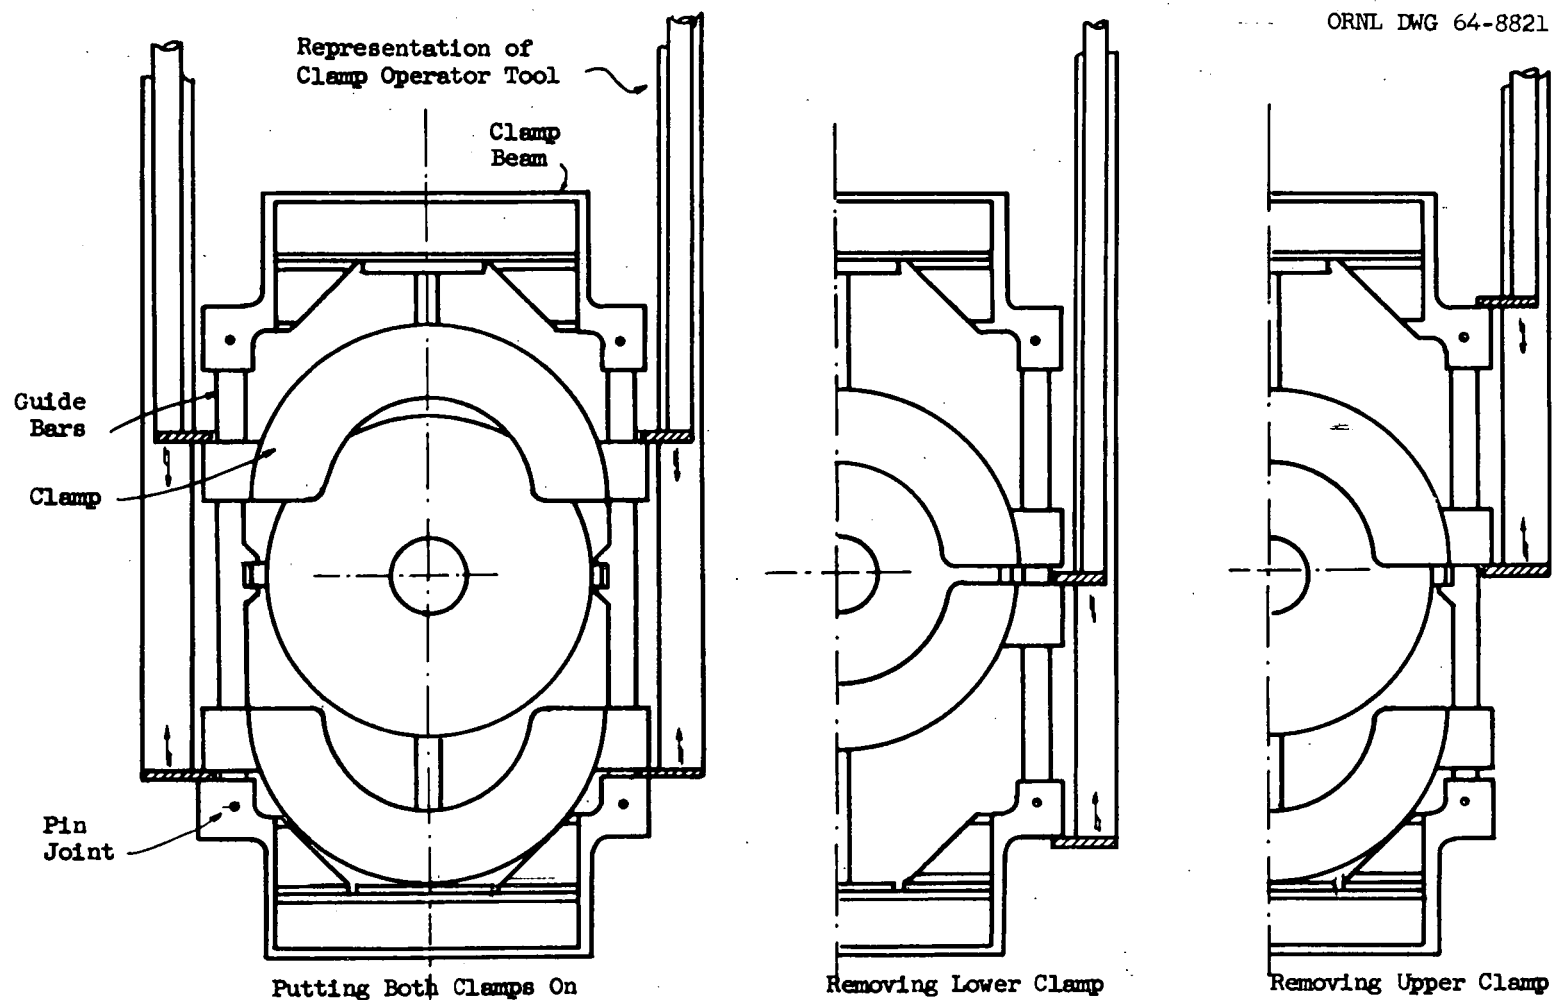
Freeze Flange Clamping Frame Showing Assembly and Disassembly
